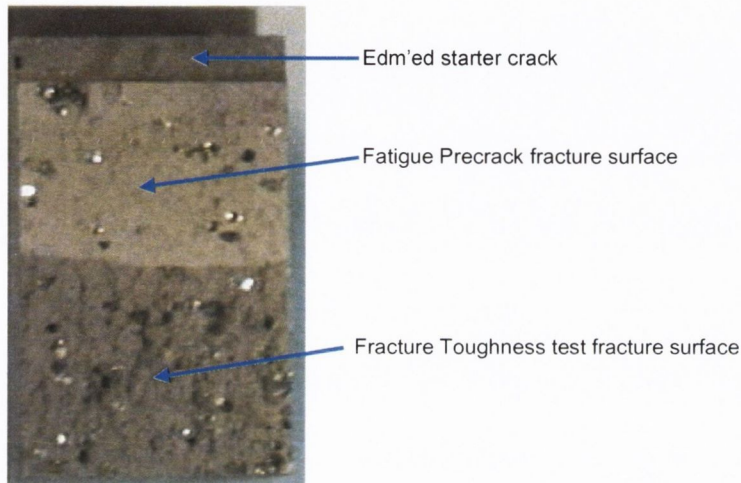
Photomicrograph showing edm crack starter notch, fatigue precrack and finally the darker grey fast fracture surface following fracture toughness test of a DICoMM specimen.
